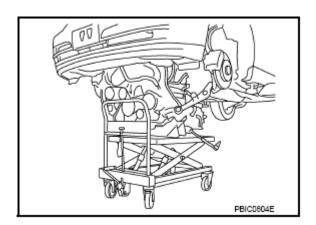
Supporting Bottom Of Suspension Member And Transmission Assembly Using Jack Courtesy of NISSAN NORTH AMERICA, INC.
